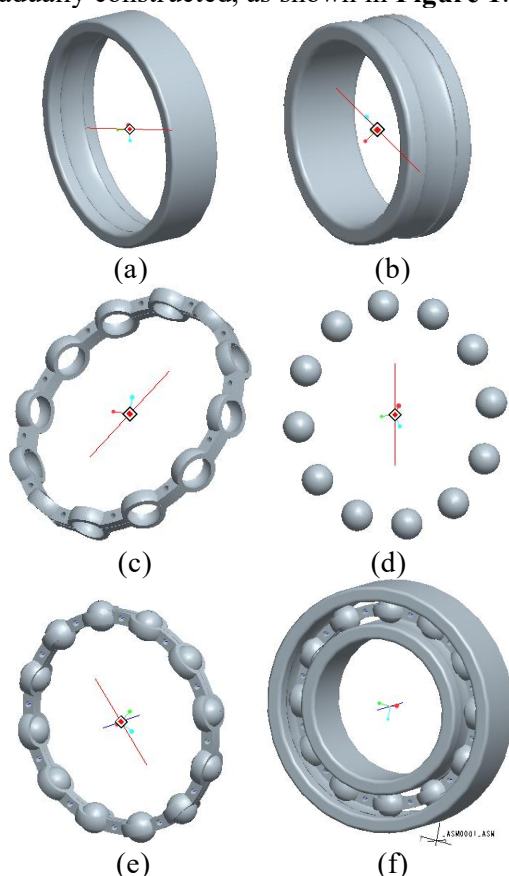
3D Model of Rolling Bearing, (a) Rolling bearing outer ring; (b) Rolling bearing inner ring; (c) rolling bearing cage; (d) rolling bearing balls; (e) rolling bearing cage and balls; (f) Rolling bearing model.
